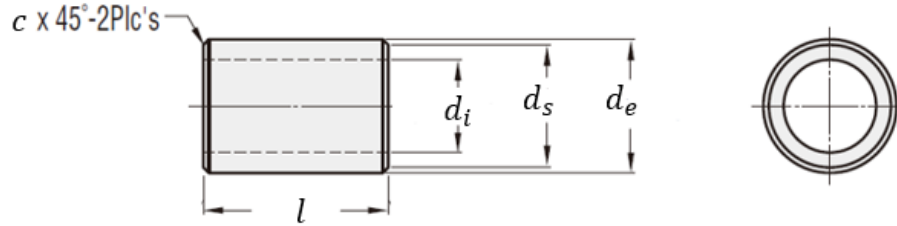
Inner race bearing spacer drawing [41] - *Courtesy of Misumi.
